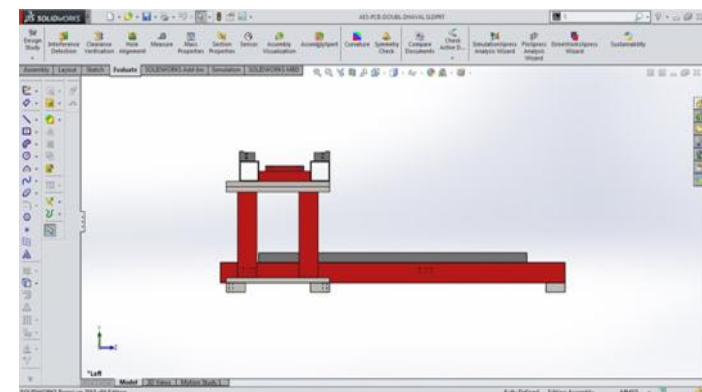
Side view of PCB Drill Mech SS 300 Structure
